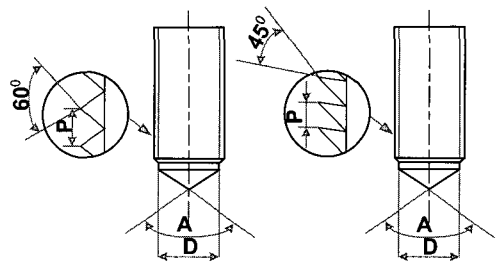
Terms for shape definition of connecting element: (a) equilateral triangular thread shape, (b) right-angled triangular thread shape
